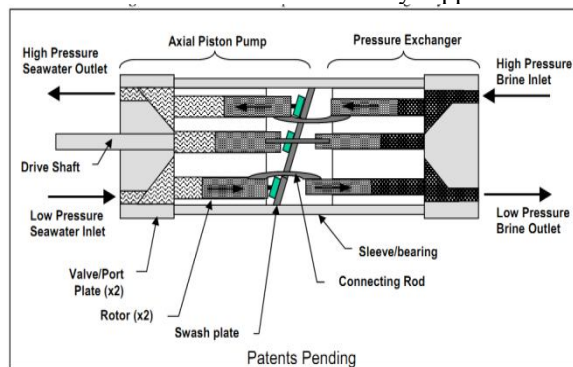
Axial Piston Pump – Pressure Exchanger Hybrid
